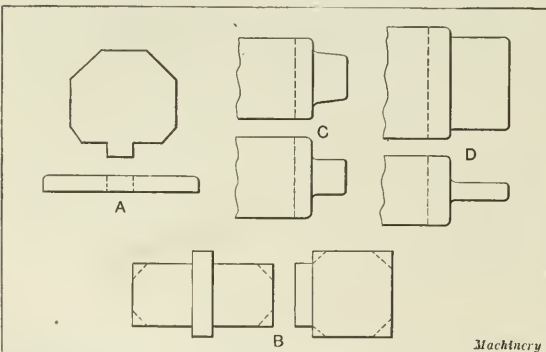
Stages in making Some of the Eye-plates shown in Fig. 56
